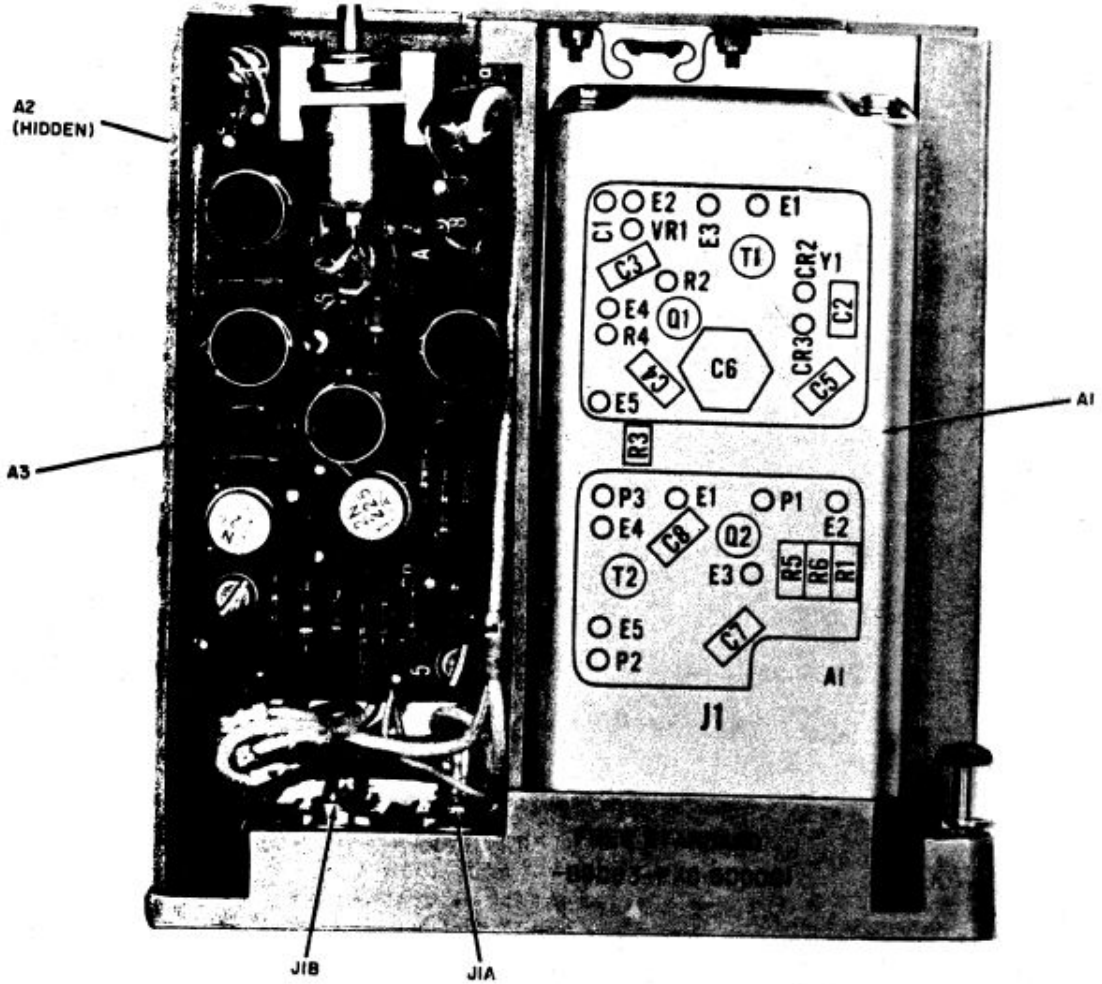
MODULE 1A3 WITH COVER REMOVED
